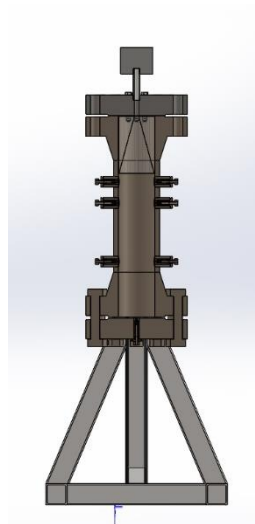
shows the drawings required to manufacture the stand that supports the 20-L shock tube. It is essentially an A-frame stand, with heavy-duty rolling casters on the bottom for easy transportation. A bearing pipe was welded atop the square tubing to harness the support pipe. Initially, a lubricated or brass bearing was envisioned to keep the support pipe concentric with the bearing pipe, but this was unnecessary. The frictional force of the 20-L shock tube was not great enough to prevent one person from easily rotating the shock tube upside down for cleaning.
